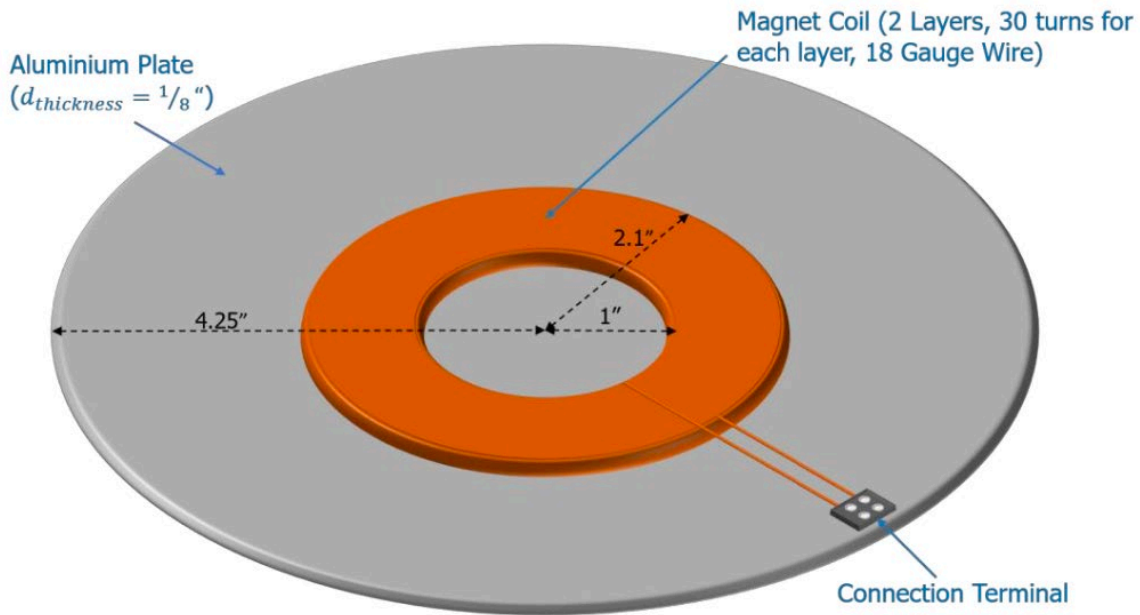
Simplified Drawing of a modulating coil with dimension.
